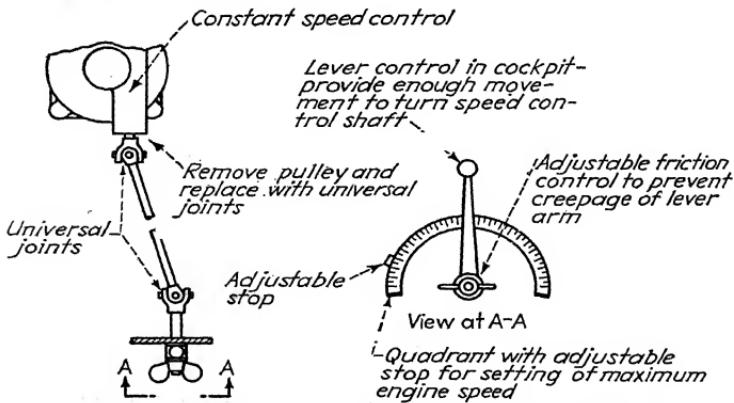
This cockpit control uses torque tubes and universal joints.
